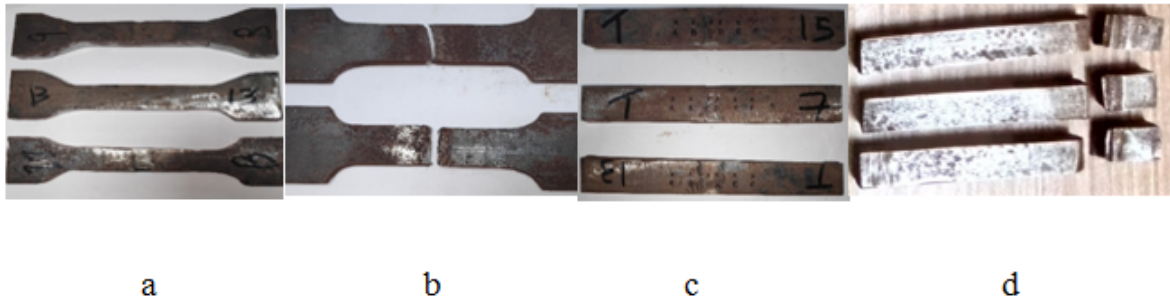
(a) Tensile specimen before fracture; (b) Tensile specimen after fracture; (c) Rockwell test sample; (d) Izod test sample
